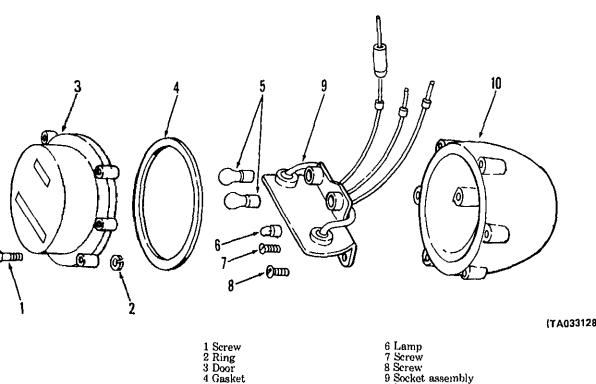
Combination taillight - exploded view. 2) Remove lamps (5 and 6) from socket as-(1) Remove clearance marker lights by
